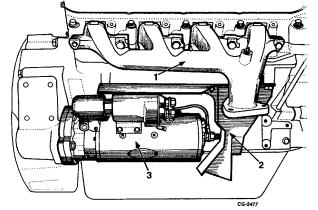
Remove Exhaust Manifold, Heat Shield and Starting Motor
